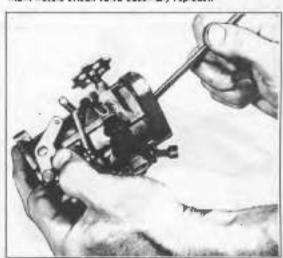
Checking Main Nozzle Ball Check Valve for Leskage
